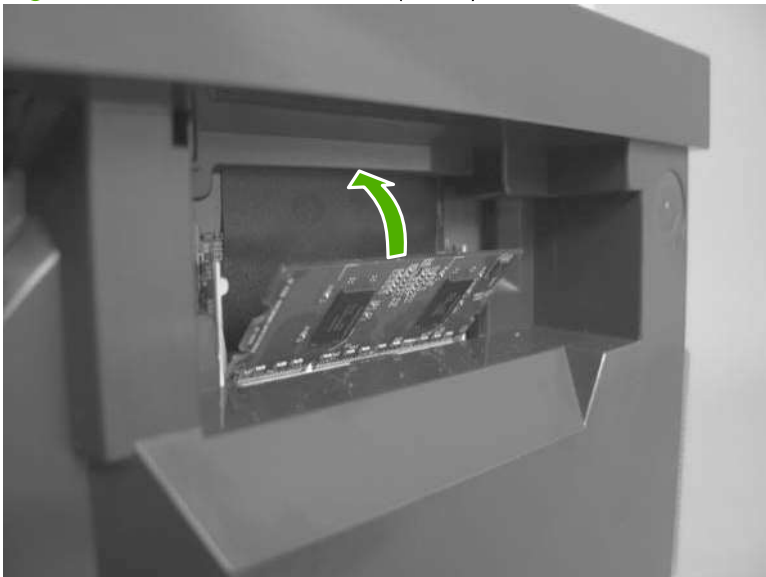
Remove the DIMM cover and DIMM (3 of 3)
